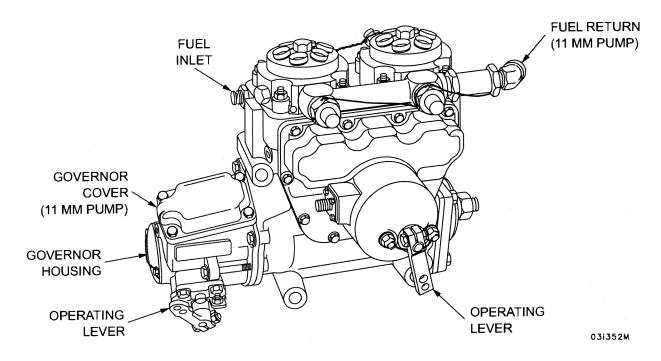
PSB-12BT Fuel Injection Pump (11 mm) Right Front View.
